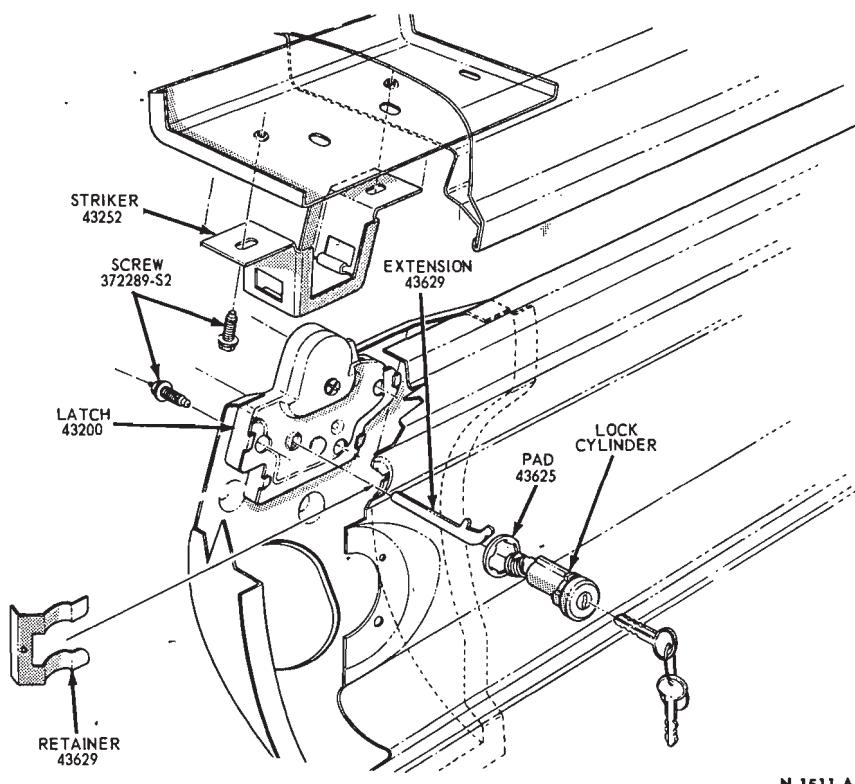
Luggage Compartment Latch Mechanism—Mustang—Typical Fairlane and Montego
